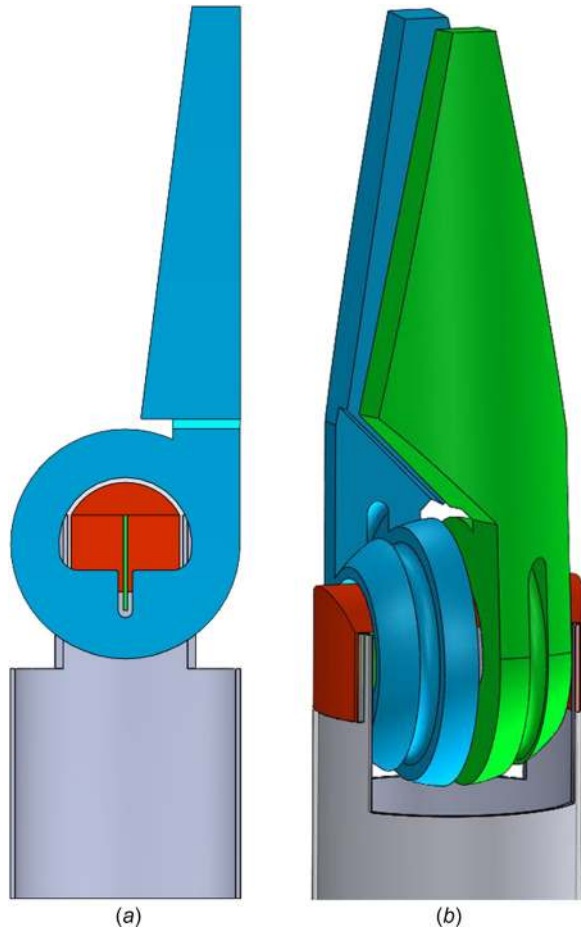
Six millimeter L-Arm model: (a) shows a section view with the jaw, the thin NiTi flexure, and the fixed portion concentric to the jaw and (b) is a model of the assembled mechanism
